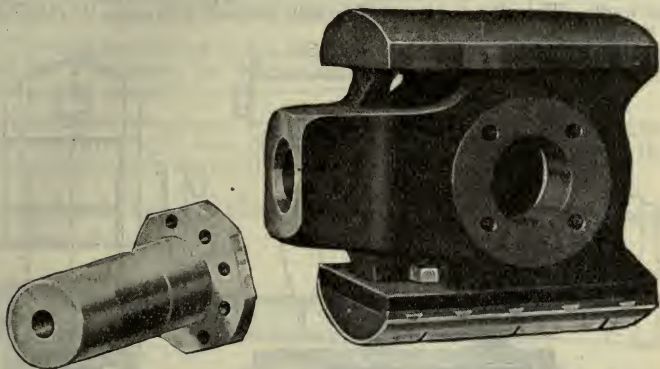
Cross head of Ames single valve engine. It is of semi-box section and fitted both on top and bottom with removable shoes spotted with babbitt forming about 40% of the wearing surface. The tapered pin is held in position by four tap bolts passing through the head of the pin. By removing these four bolts and replacing in tapped holes provided in the flange, the pin may easily be drawn from the cross head without the use of a sledge, making it possible to remove and replace the pin from the front side of the engine. The pin may be turned 90° when worn to provide new wearing surfaces.
